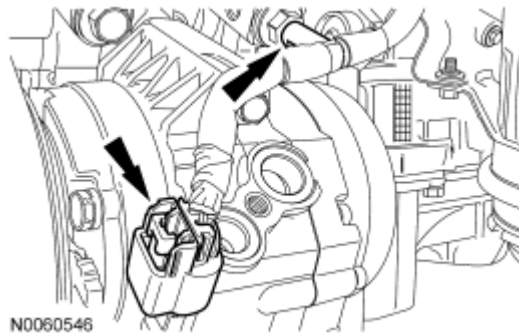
Identifying A/C Compressor Electrical Connector & Wiring Harness Retainer
